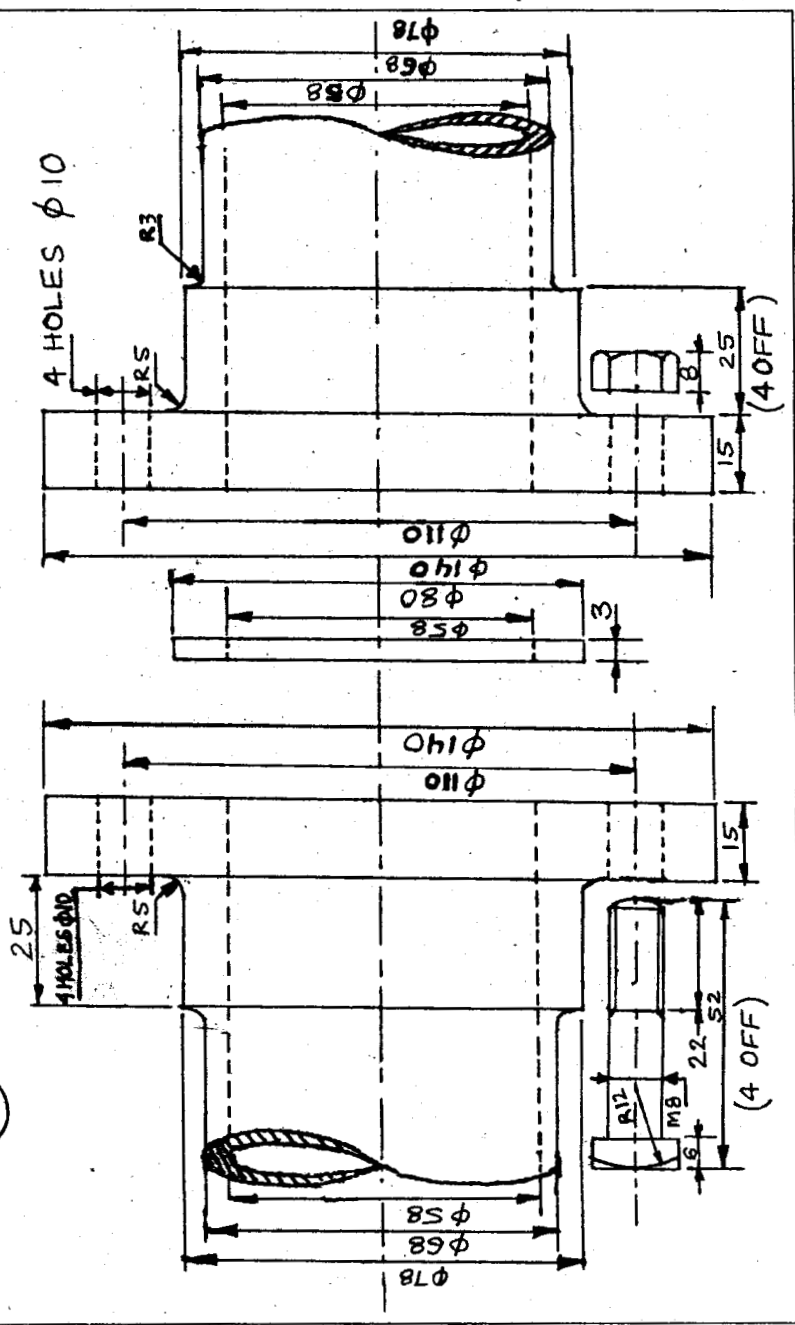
shows the details of a Flanged Pipe Joint. Assemble these parts correctly, and then draw the following views to a scale full size:
